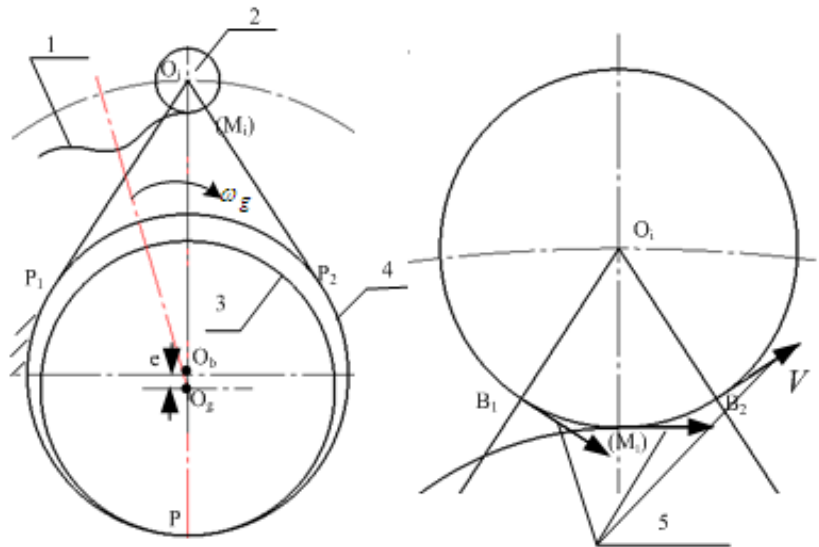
The sliding of tooth surface during meshing in cycloid gear pair.
